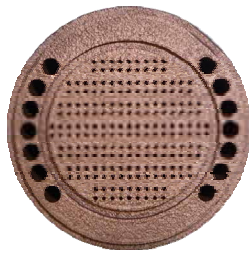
Unidirectional porous copper fabricated by 3D printing technique
